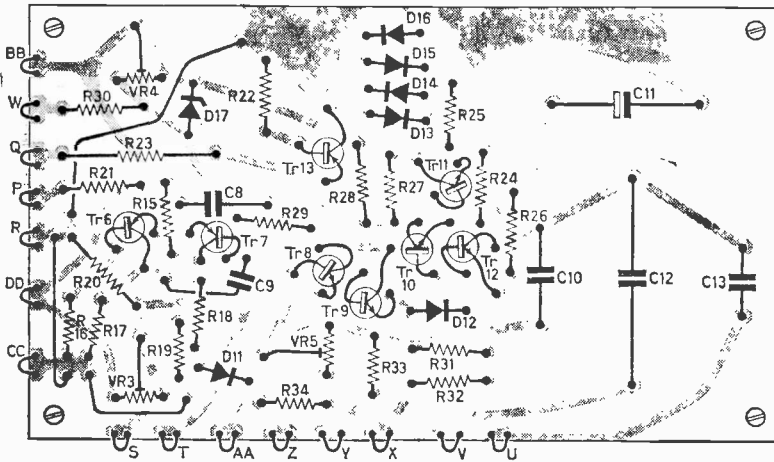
(left): Rate meter printed board layout viewed from the print side. Actual size 6 x 3½ in.
